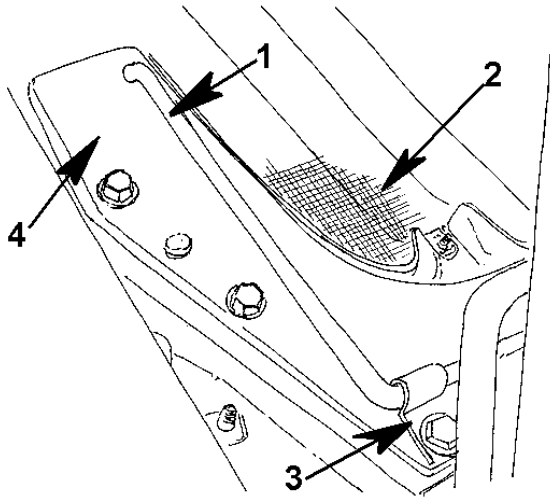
Torsion Bar Hood Mounting Assembly (Driver Side Shown)
